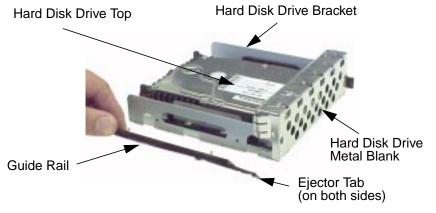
Installing the Hard Disk Drive in its Mounting Bracket
